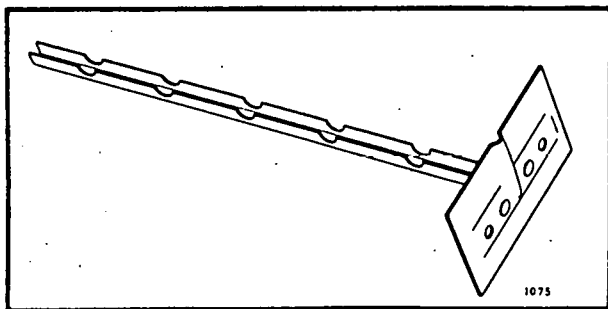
BULB HOLDER FOR MOUNTING SENSING ELEMENT.
